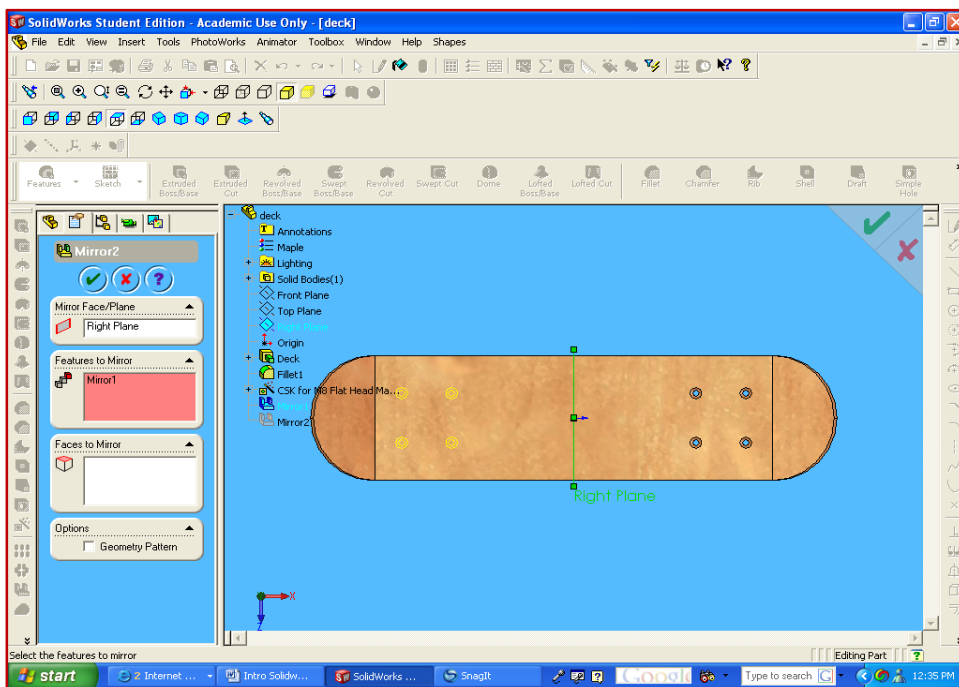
Duplicating the 4-hole Pattern Across the Right plane
